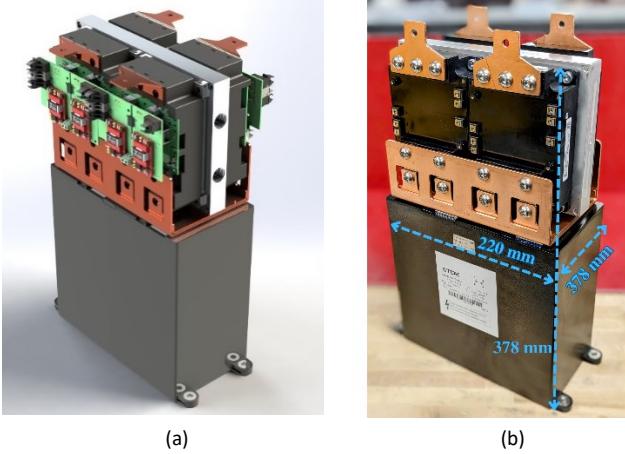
The assembled building block (a) 3D render of the designed building block; (b) a picture of the assembled building block showing its dimensions
